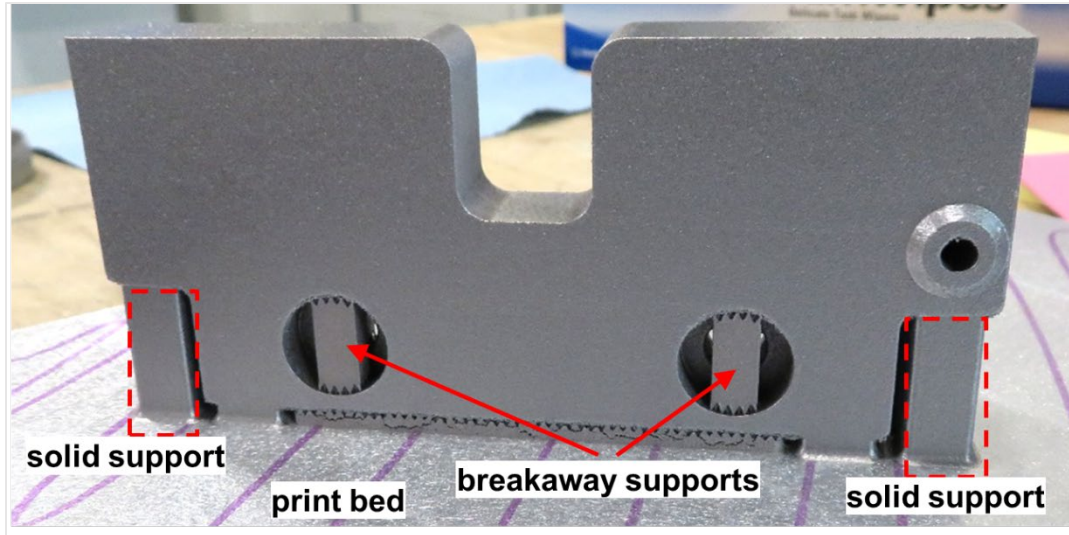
Photograph of slot die heater still welded to build plate, showing both solid and breakaway supports.
